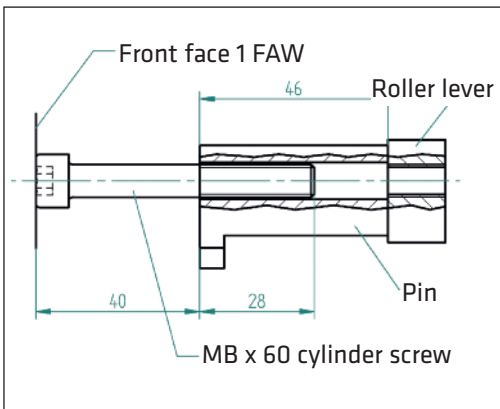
Dimensioned technical drawing of the cylinder screw and pin
